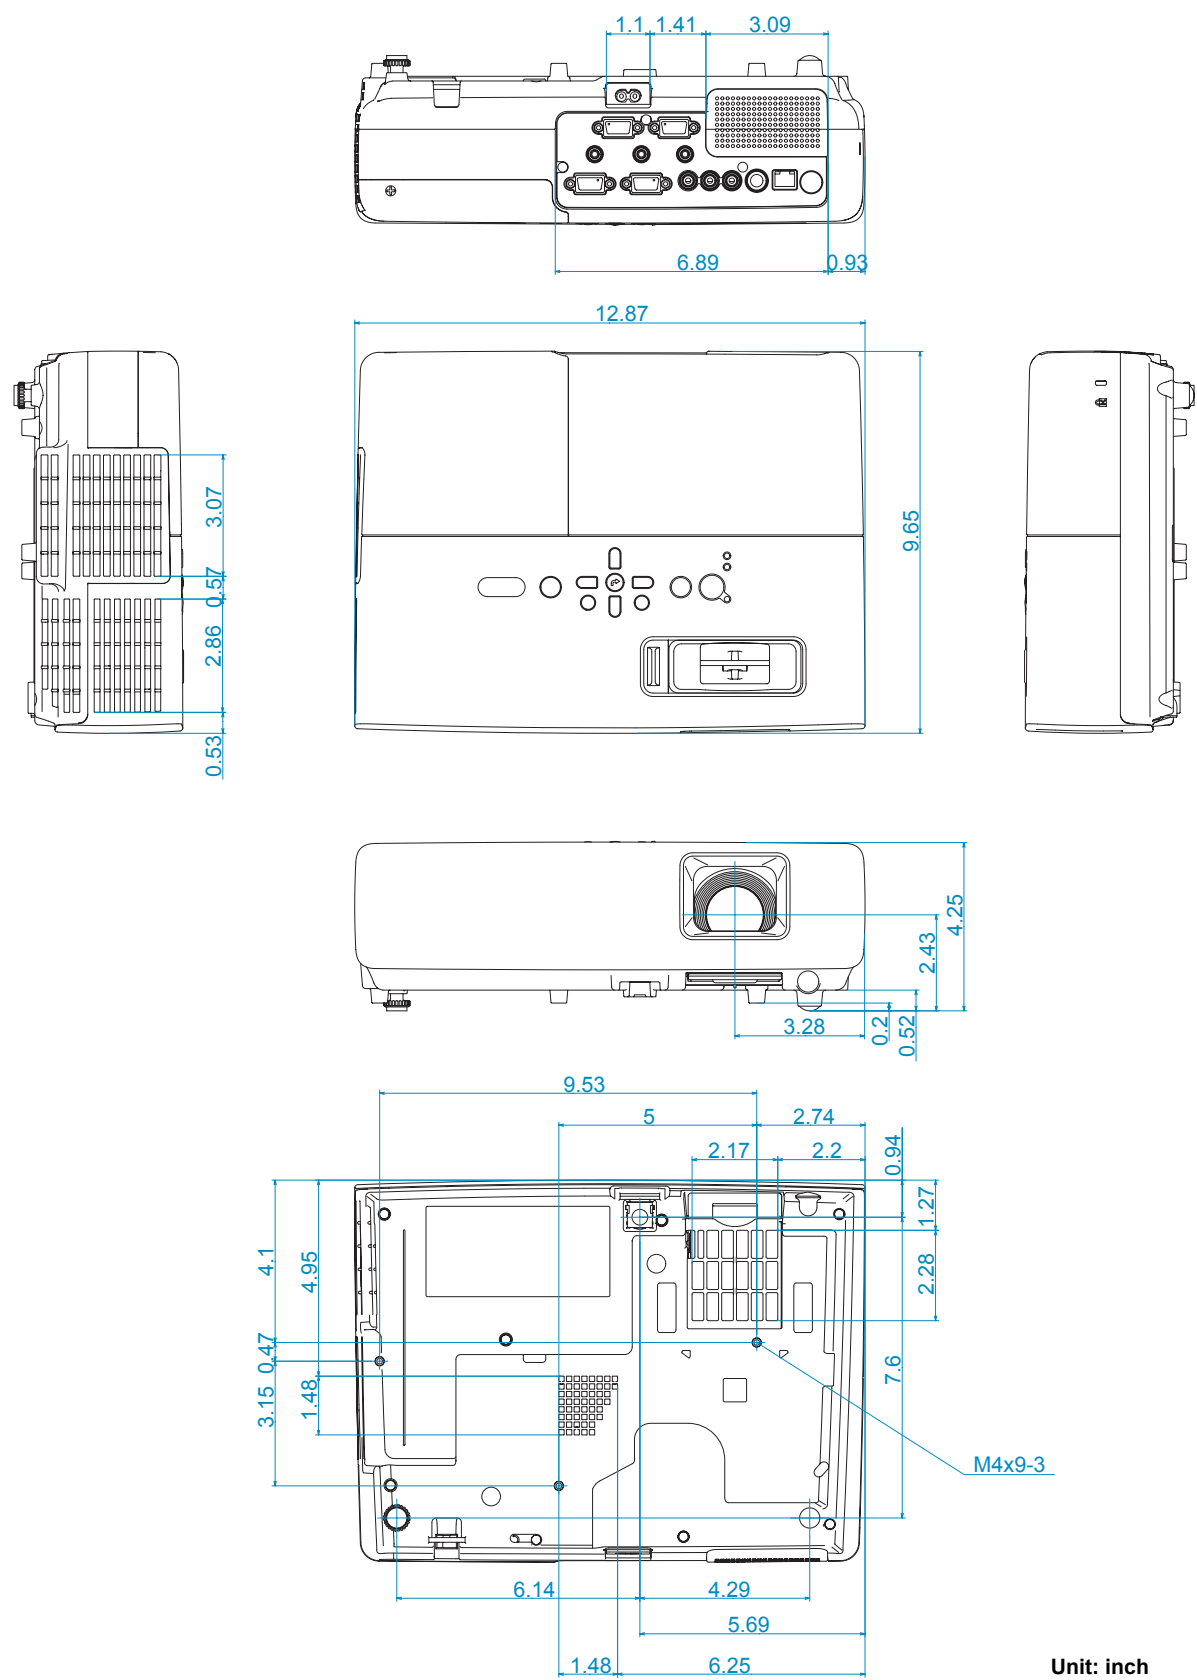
External Dimensions (EMP-822/83) (inch)
